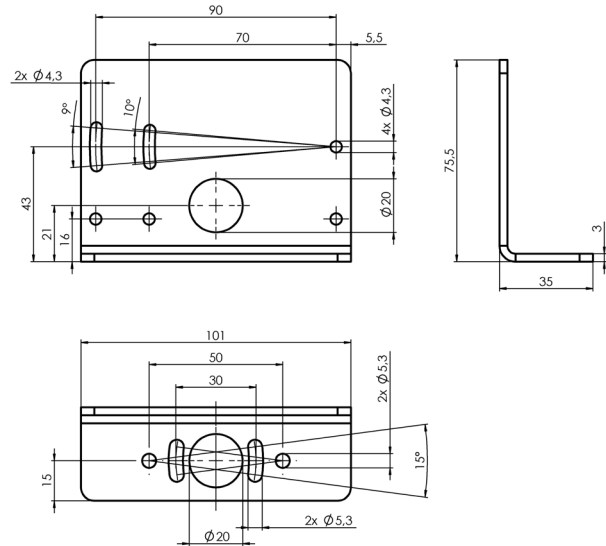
Holder dimensions for emitters BLA 72D und BLA 100D
